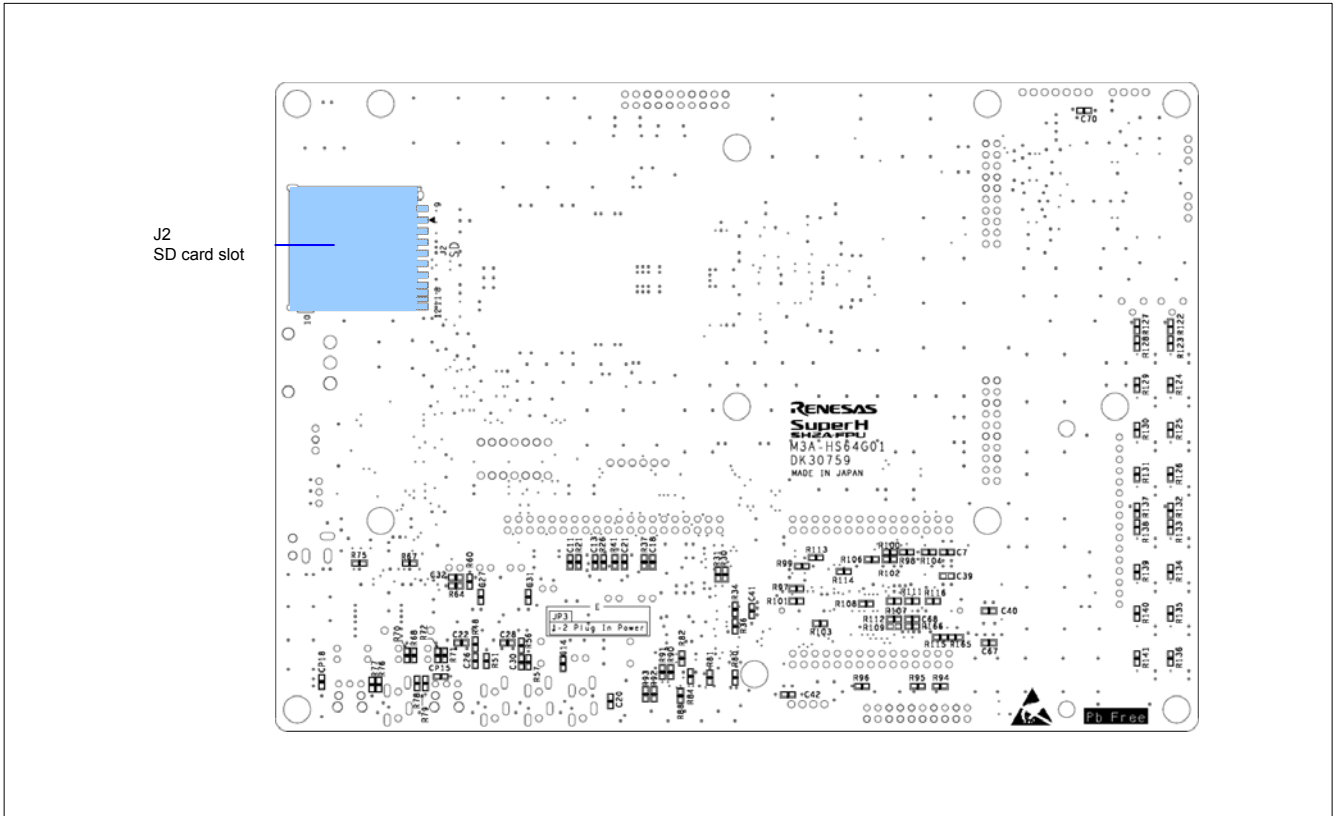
M3A-HS64G01 Connectors (Top View of the Solder Side)
